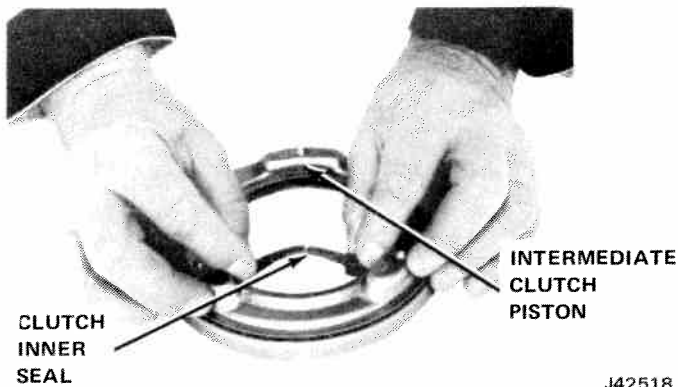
Installing Inner Seal on Intermediate Clutch Piston
